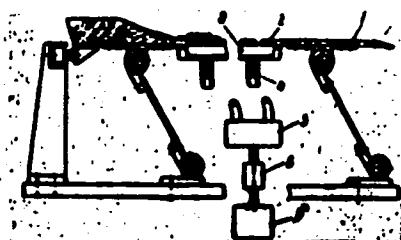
Vibratory vacuum conveyor for flat air-tight parts
